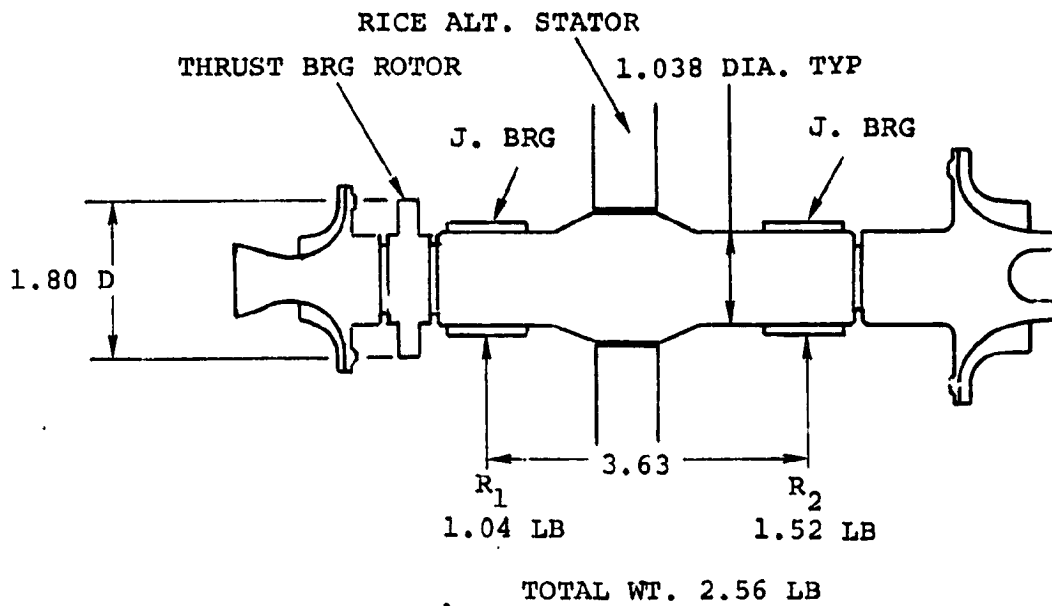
Mini-BRU Rotating Group Bearing Spacing.
